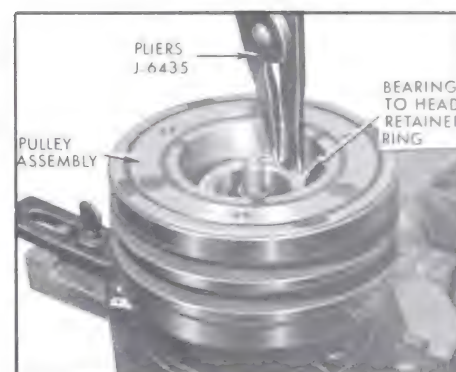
Removing or Installing Bearing to Head Retainer Ring
